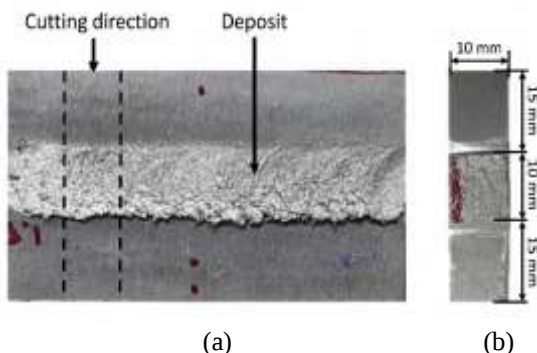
(a) Position and direction of FS deposit sampling; (b) dimensions of the bending test specimen.
